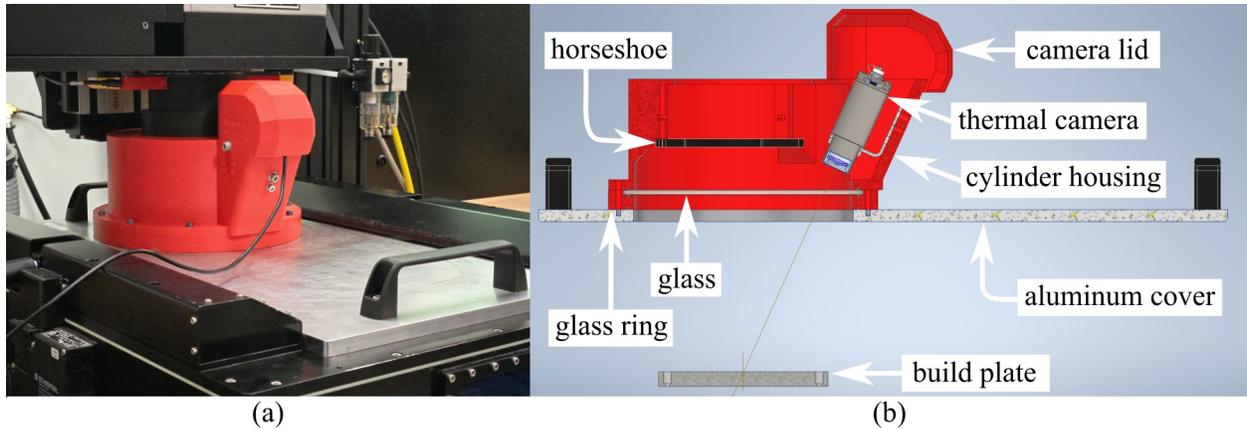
The thermal camera module, showing: (a) the assembled module installed on the Aconity MIDI Laser Powder Bed Fusion system and (b) a cross-section view of the module developed in CAD.
